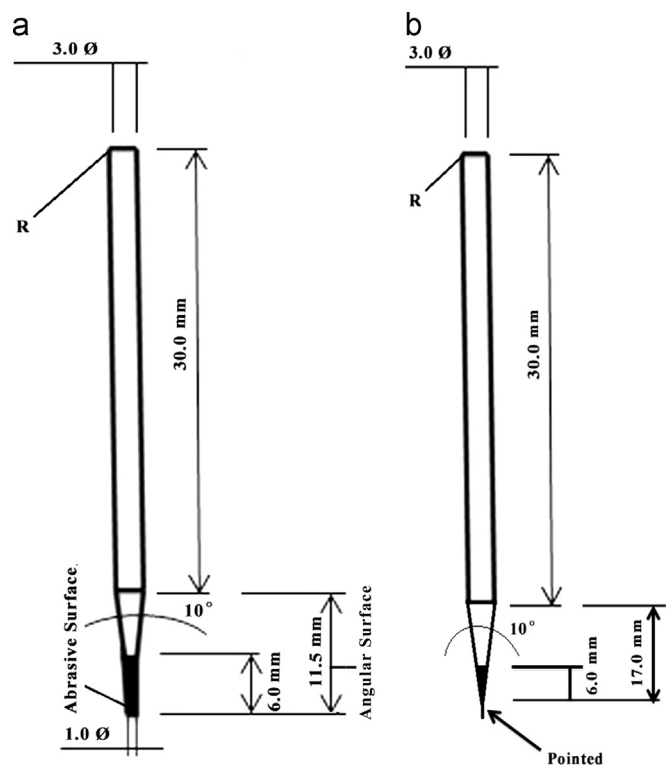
Schematics of (a) conical flat end and (b) conical pointed end tool.
